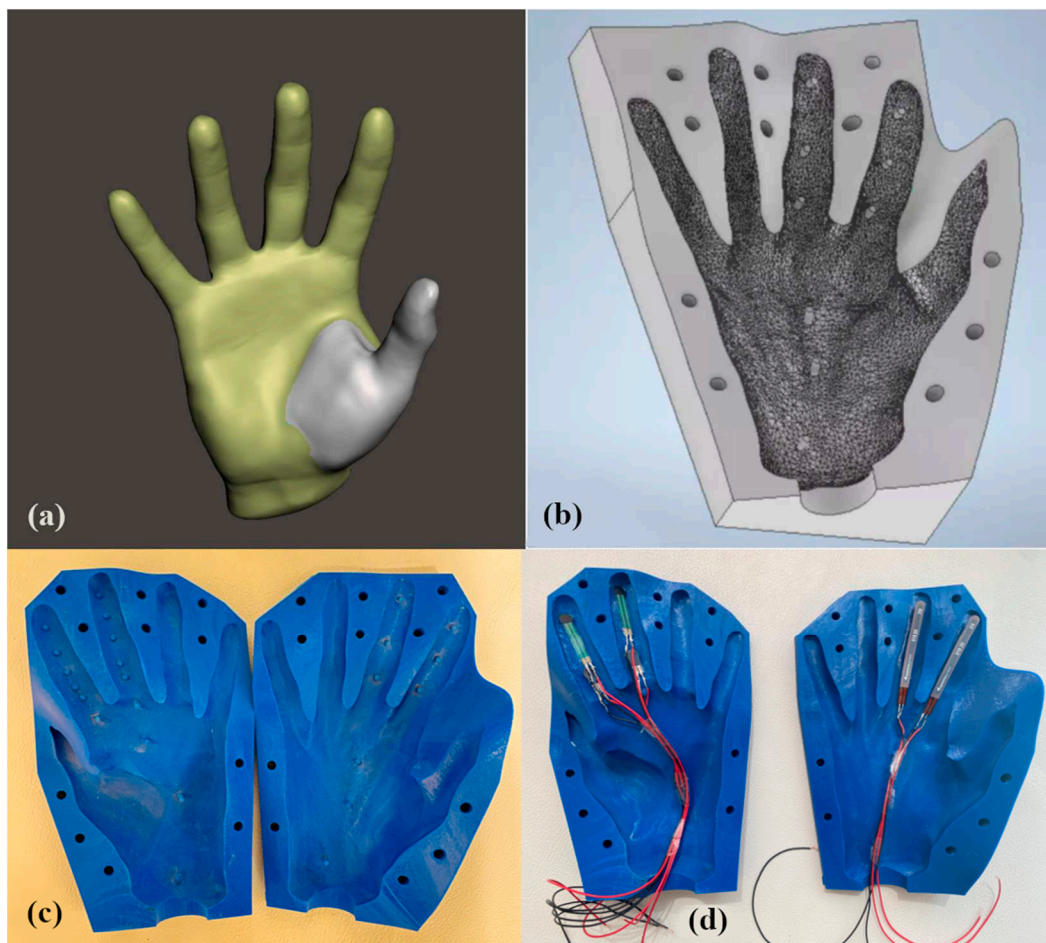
Conceptualization. (a) 3D-scanned hand; (b) Casting mold component created in CAD; (c) 3D-printed mold components; (d) Mold components with attached sensors.
